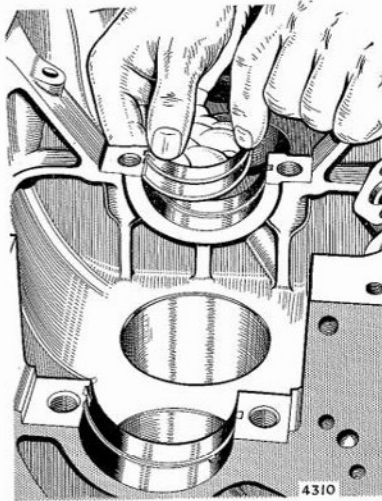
Fitting the upper halves of the main bearings to the crankcase
